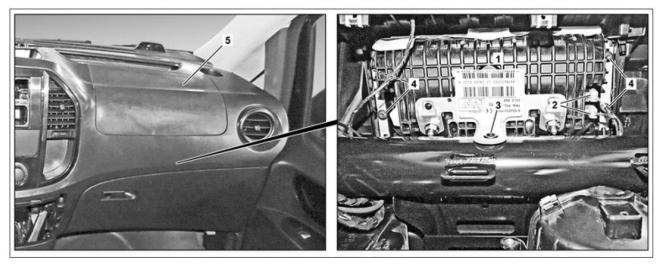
(1 Front passenger airbag 2 Air bag connectors 3 Bolt 4 Air bag mounting bolts 5 Cover)
